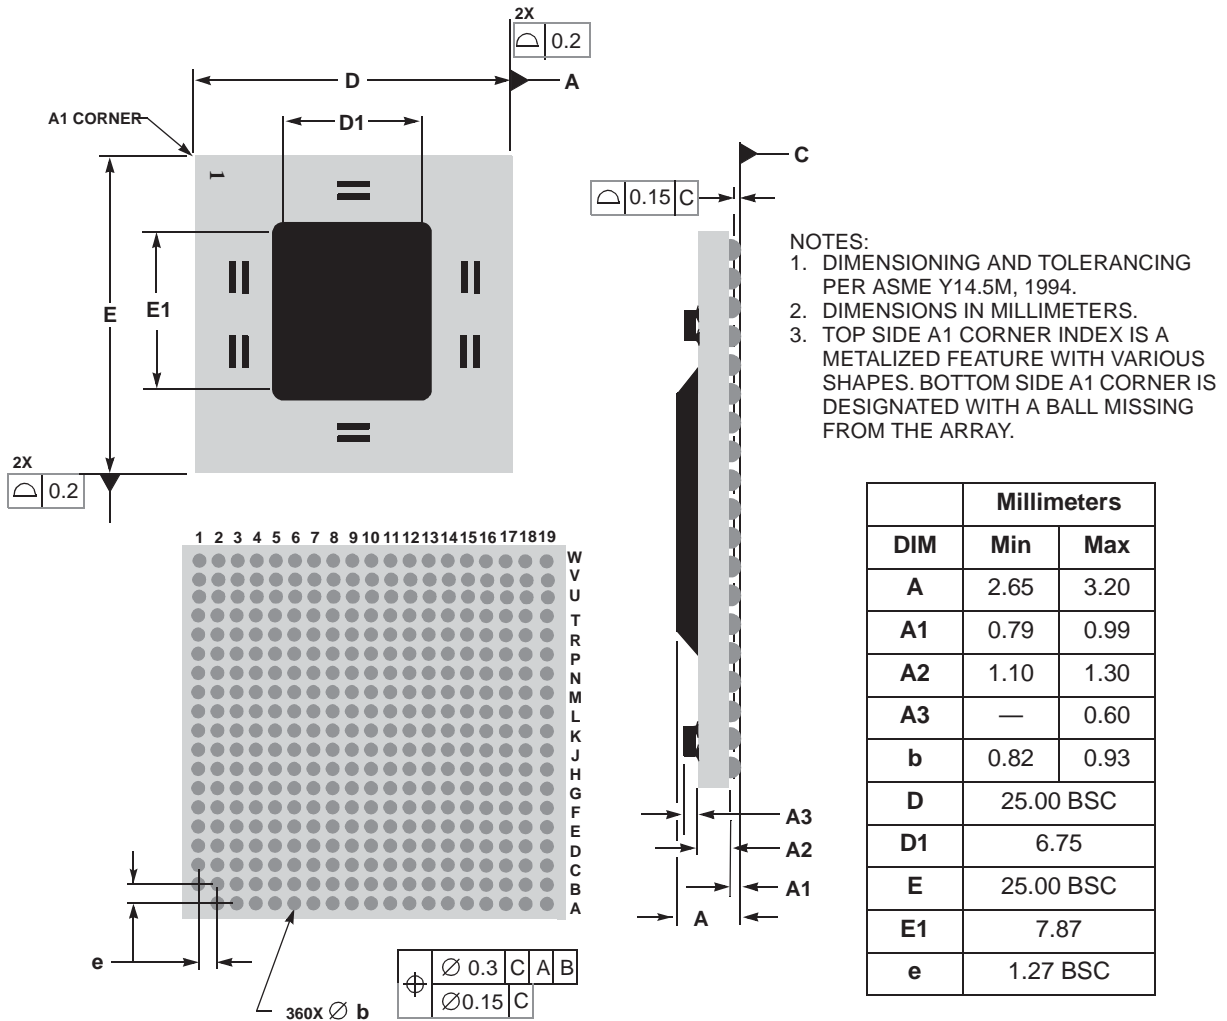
Mechanical Dimensions and Bottom Surface Nomenclature of the PC755 PBGA
